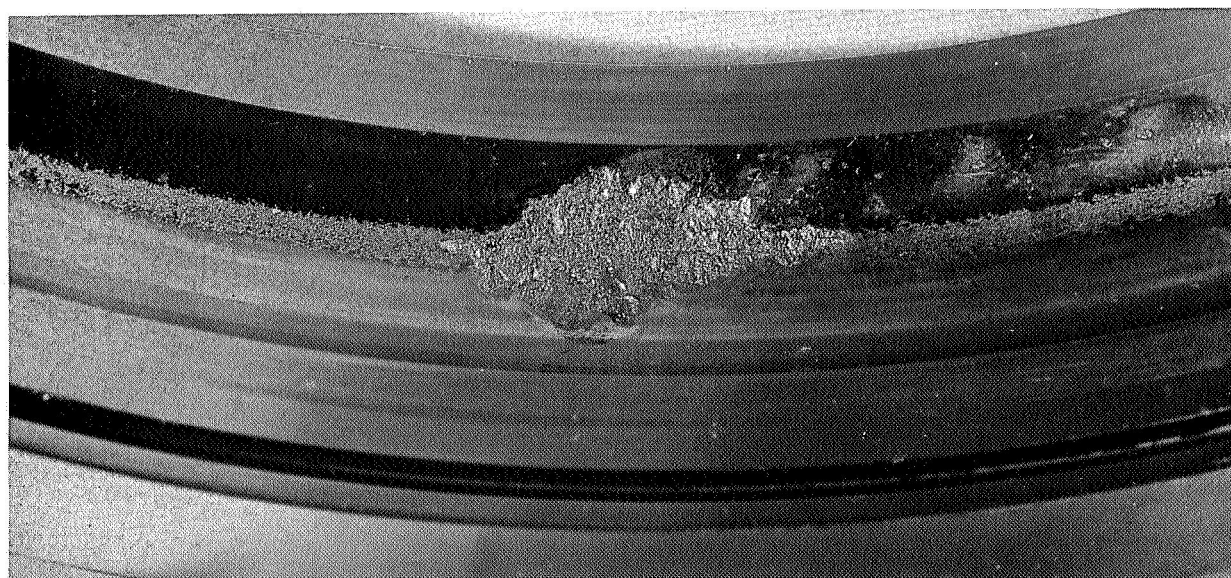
INNER AND OUTER RING FATIGUE FAILURES, S/N 257
